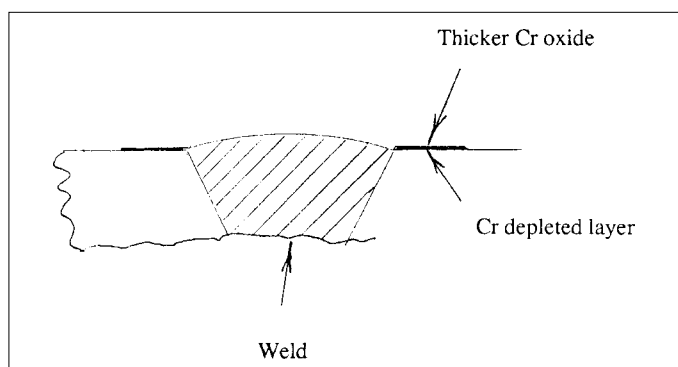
Hint tint: Thicker chromium oxide layer in heat affected zone of weld; Chromium depleted layer beneath.
